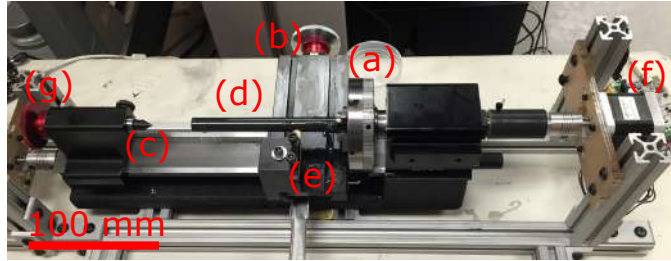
Smooth Cylindrical Coater. The device is a modified Sherline Mini lathe. (a) Spindle. (b) Manual Cross-sectional degree of freedom. (c) Live center. (d) Aluminum Rod. (e) Smoothing tool. (f) Stepper motor with laser-cut mount, which provides power to the spindle. (g) An automated axial degree of freedom to move the stage along the axis of the spindle.
